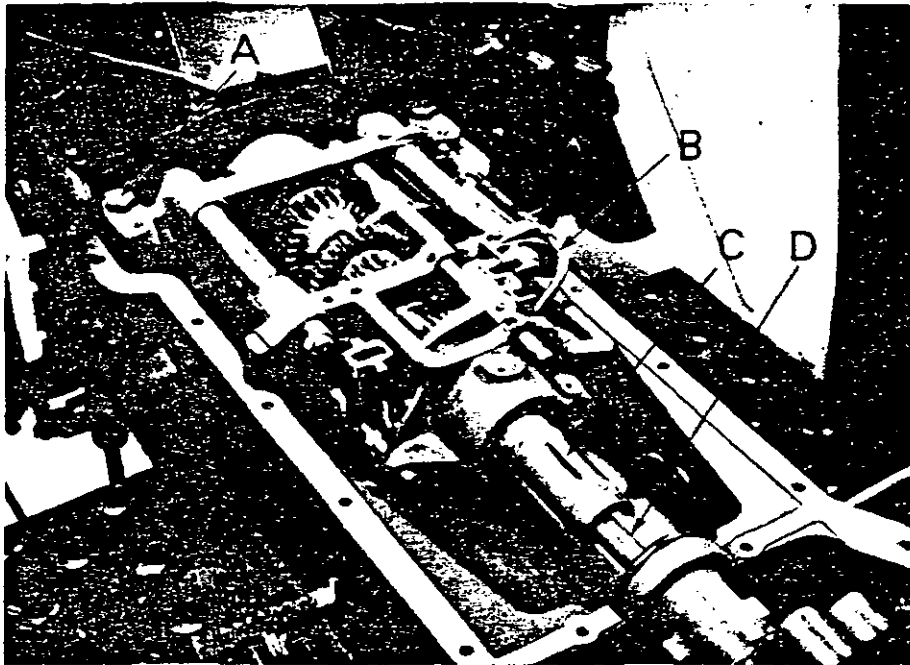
'770' TRACTOR WITH GEARBOX COVER REMOVED
